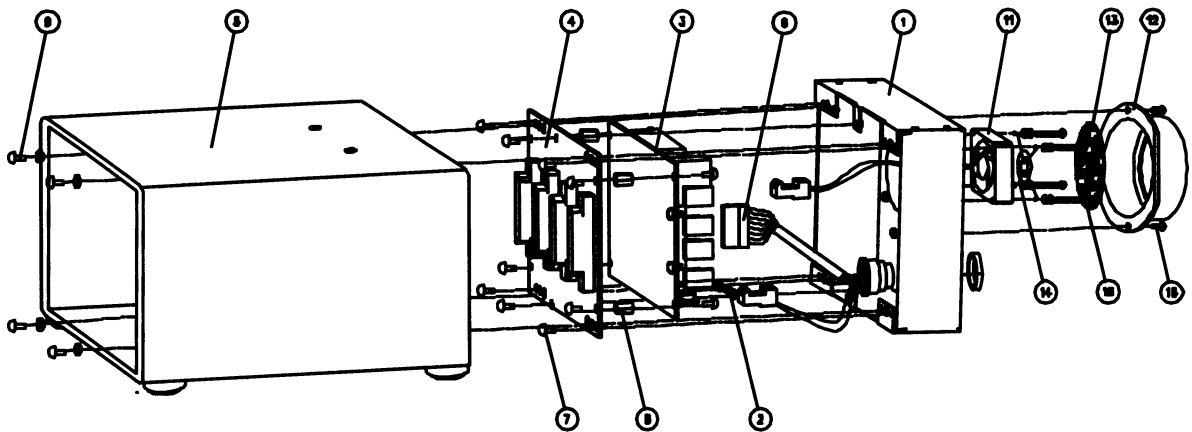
Exploded view of F-EXT4, rev. 02, 03
